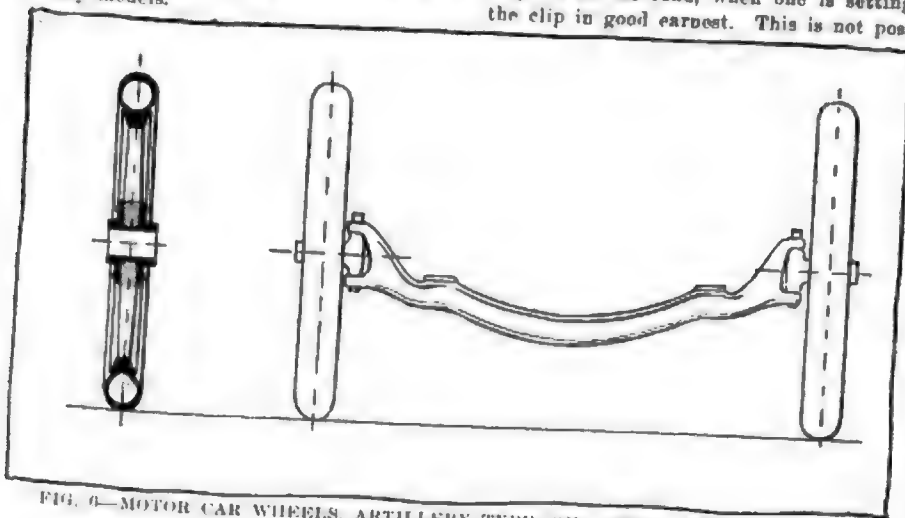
MOTOR CAR WHEELS, ARTILLERY TYPE, ON STRAIGHT SPINDLES
